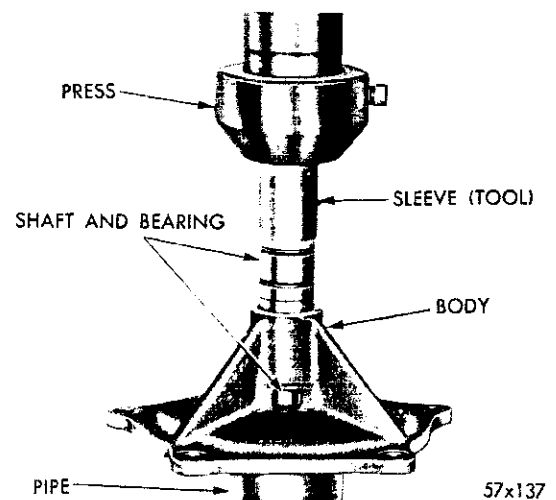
Installing Shaft and Bearing Assembly Using Tool C-3468
